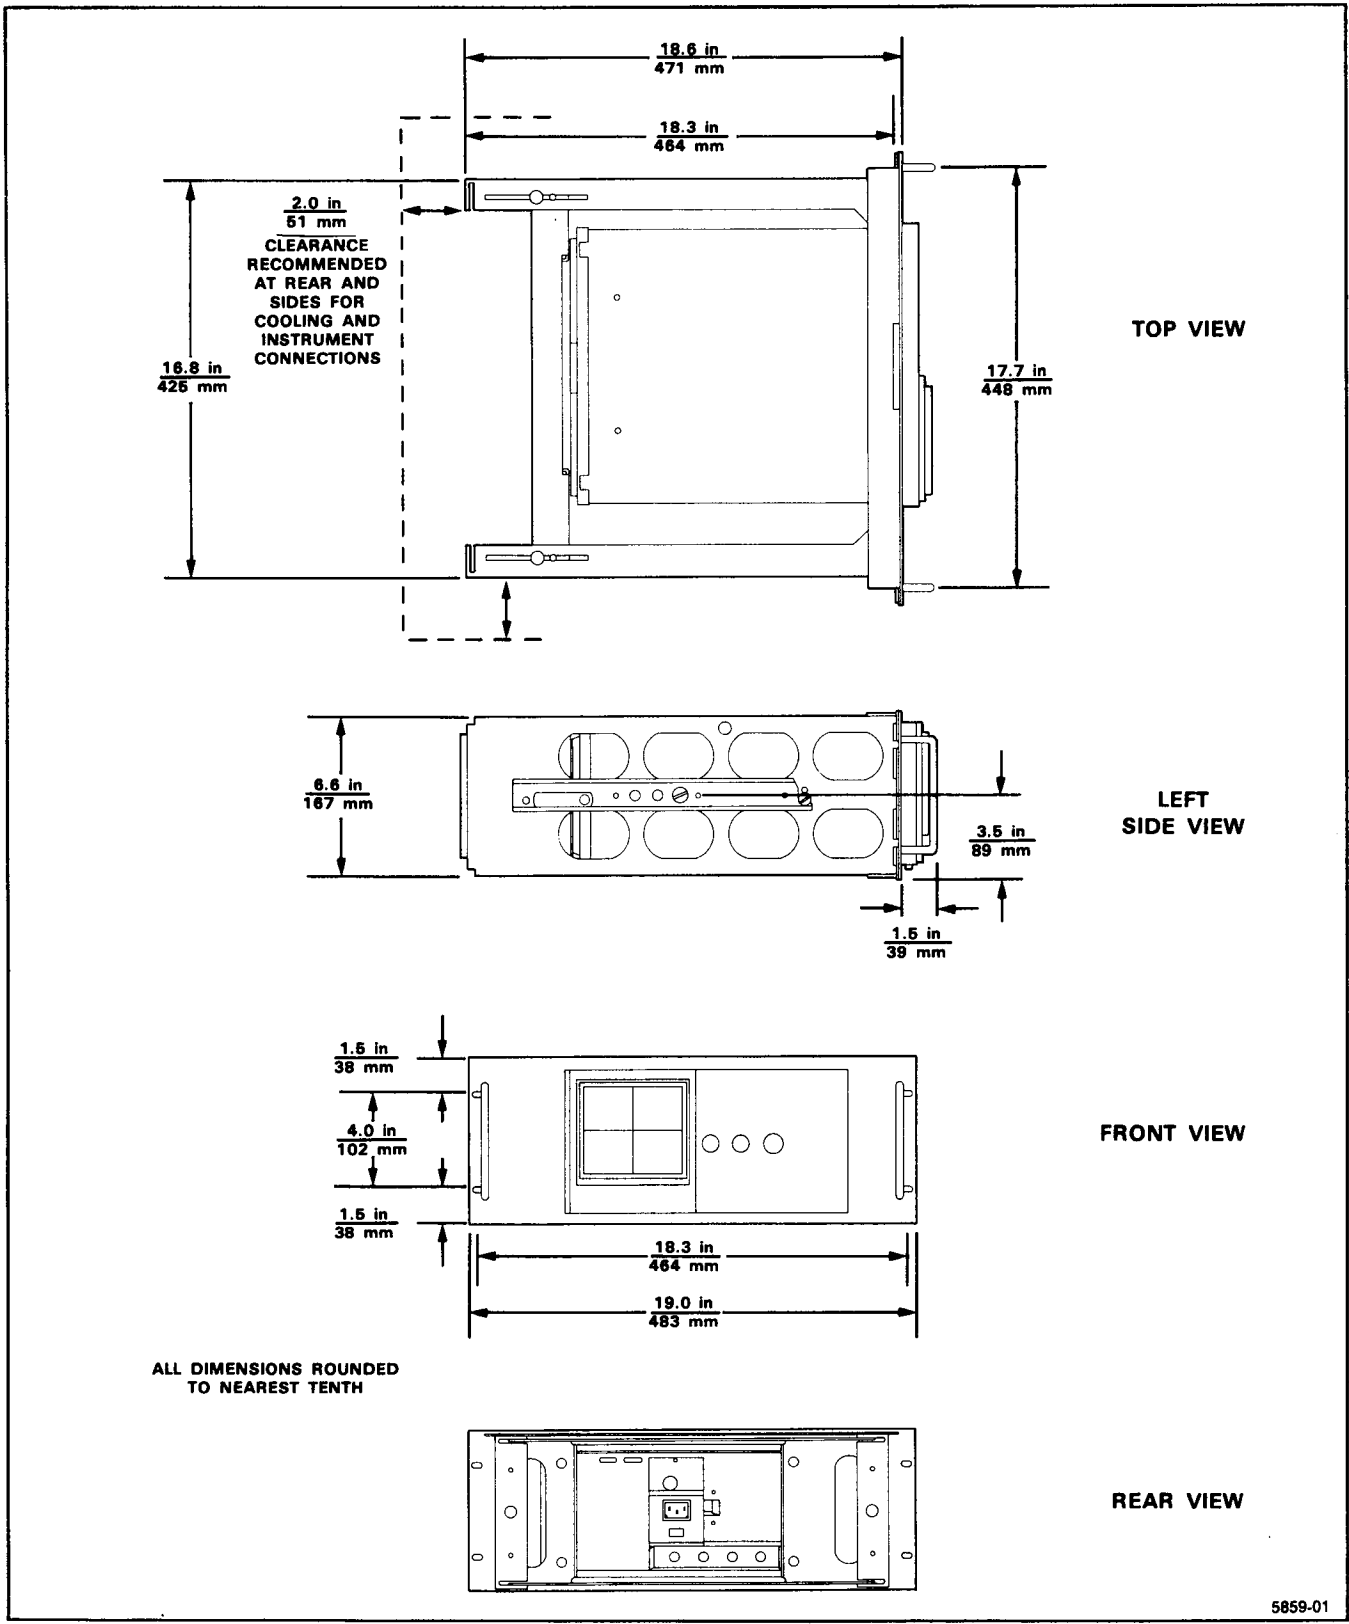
Dimensional drawing of the 2400 Series Rack Adapter.
